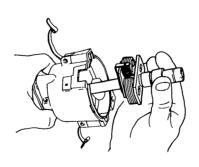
Removing rotor shaft and drive shaft assembly
